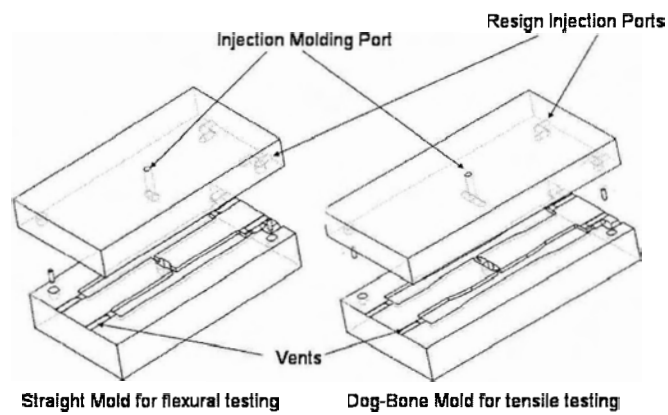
Injection Port Options: Flexure Mold (left) and Tensile Mold (right)
